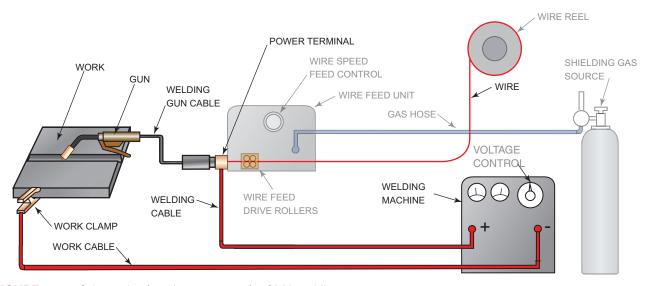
Schematic of equipment setup for GMA welding.
